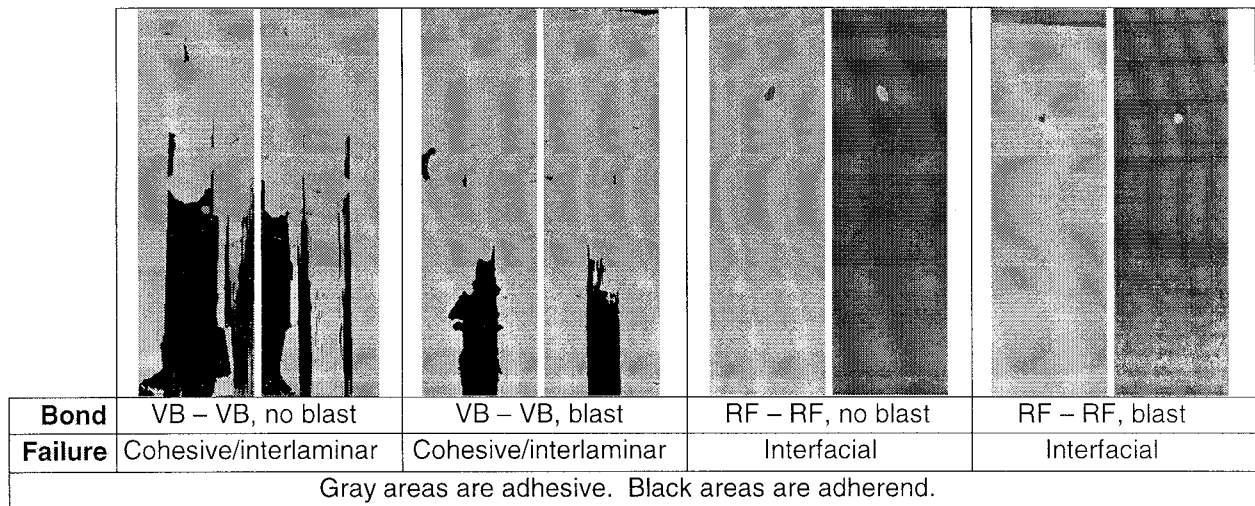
Computer-enhanced pairs of fracture surfaces of bonded composite DCB specimens.
